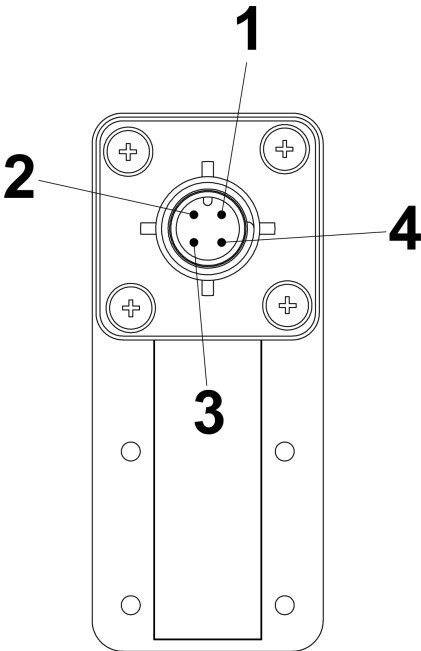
Pin-assignment, socket M12x1 (Form 30x70)
